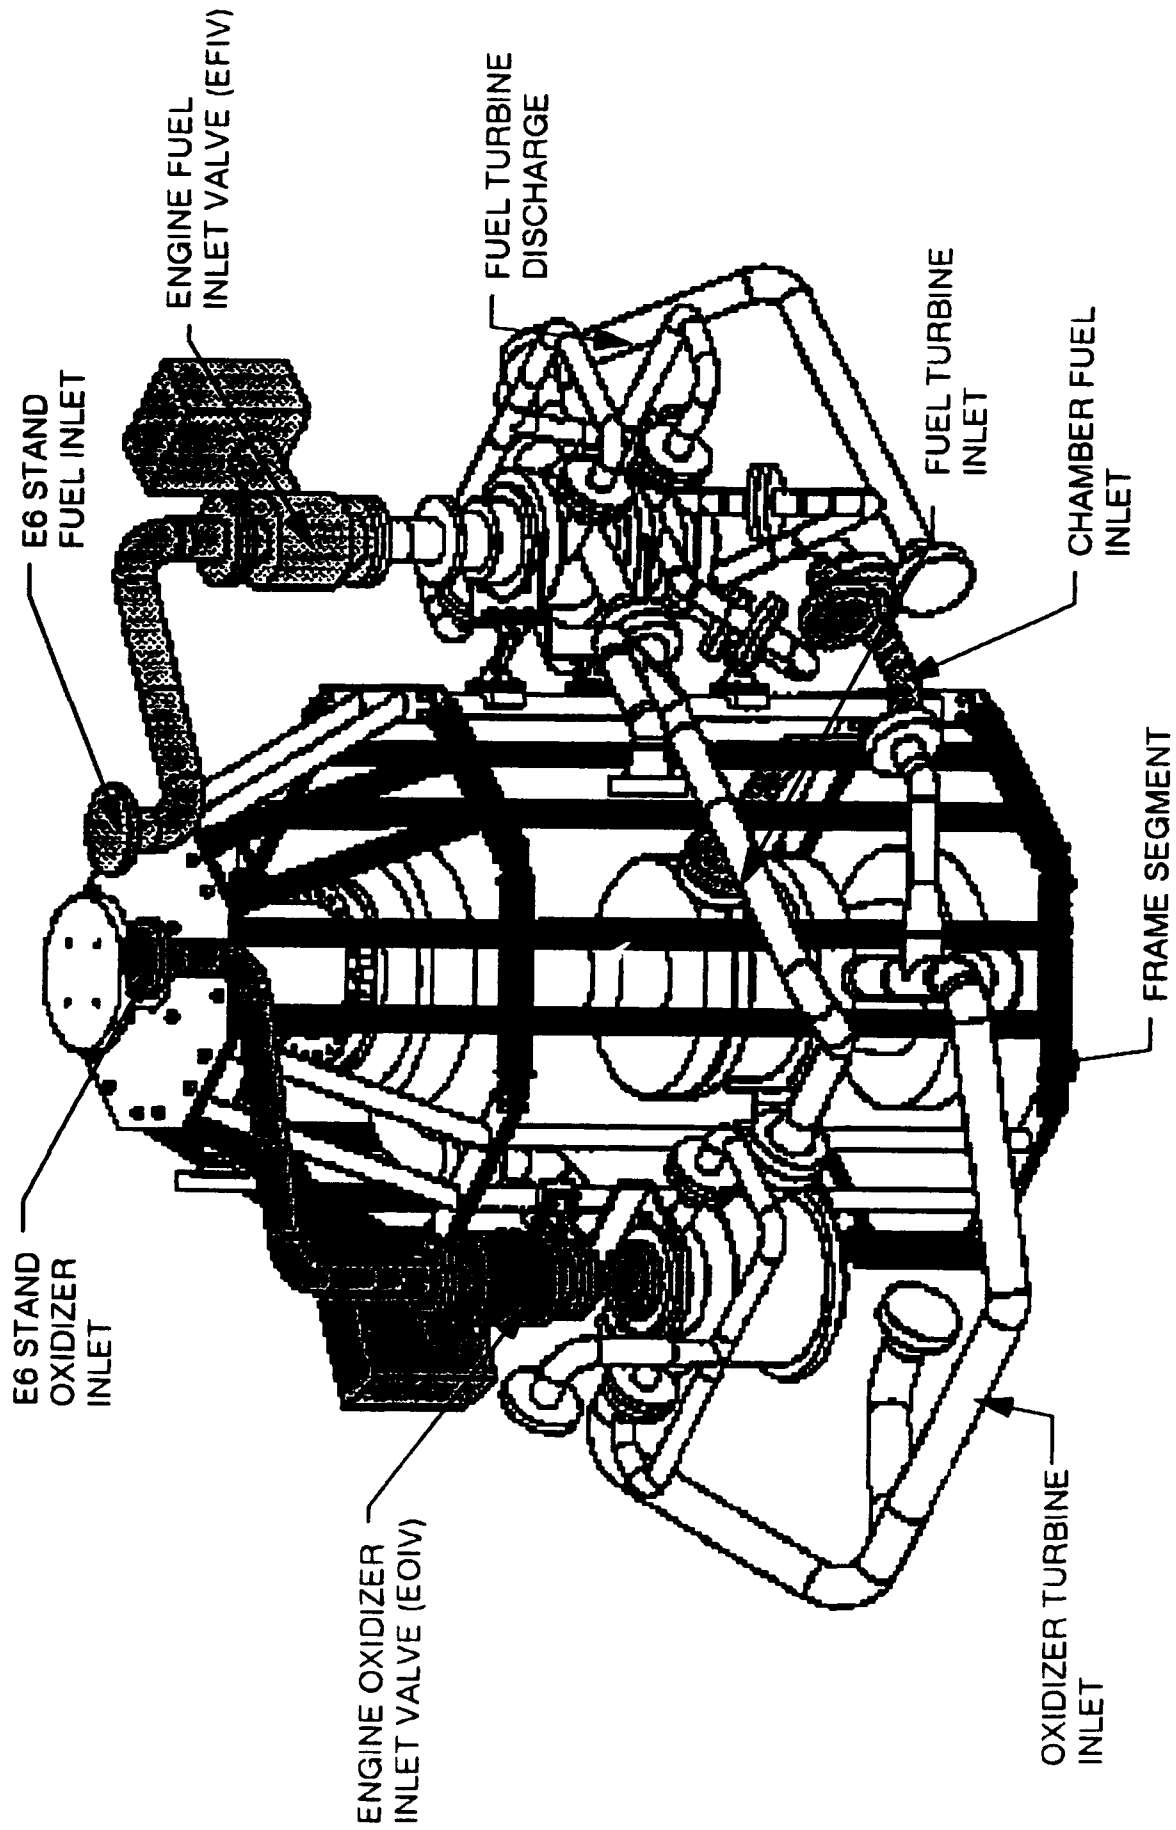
Frame Completed, Initial Plumbing and Valves Added
